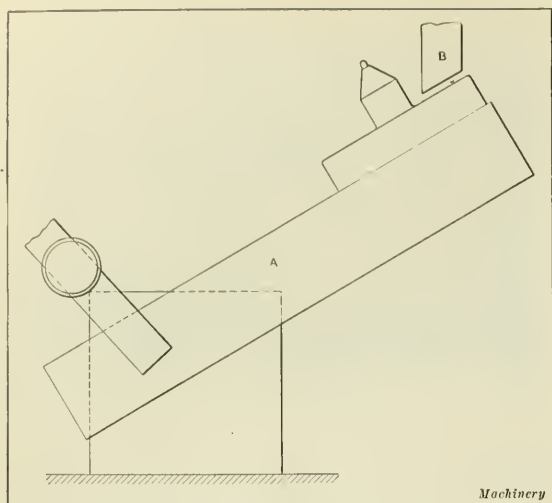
Using Master Angle-block to get True Angle on Grinding Wheel
